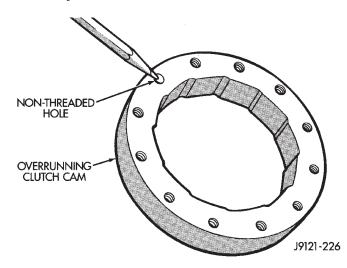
Location Of Non-Threaded Hole In Clutch Cam
